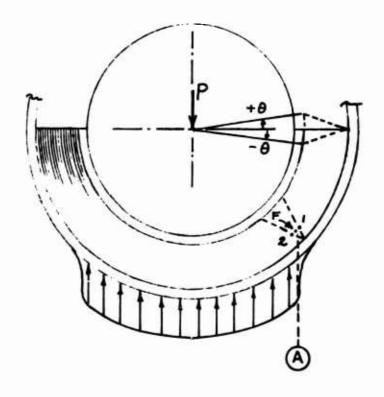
Representation of Load Distribution - Radial Elastomeric Bearing.
